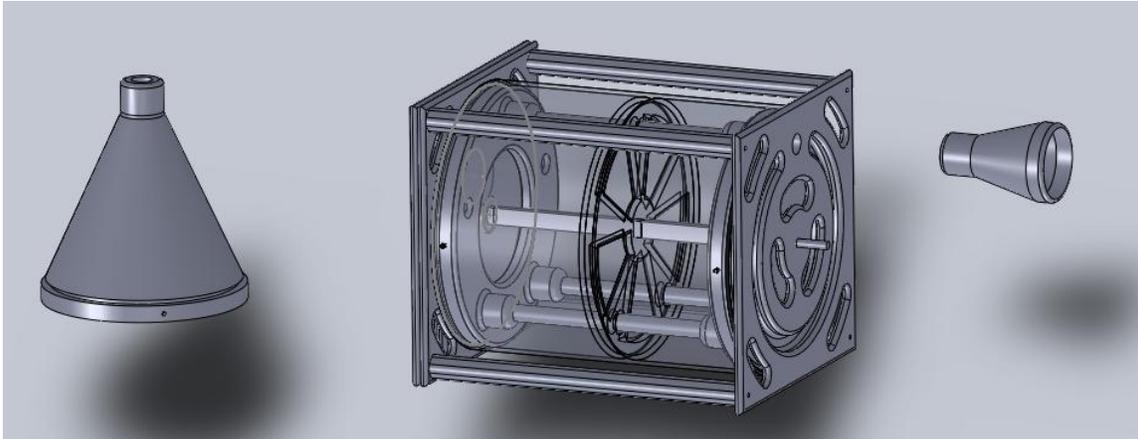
Final design of the mercury assembly. Air enters the system through the left funnel, will be drawn through tubing into the cylinder, and out the vacuum adapter funnel on the right. Only one trap will be tested at a time, and will be sealed off because of the rotating cylinder when not in use.
